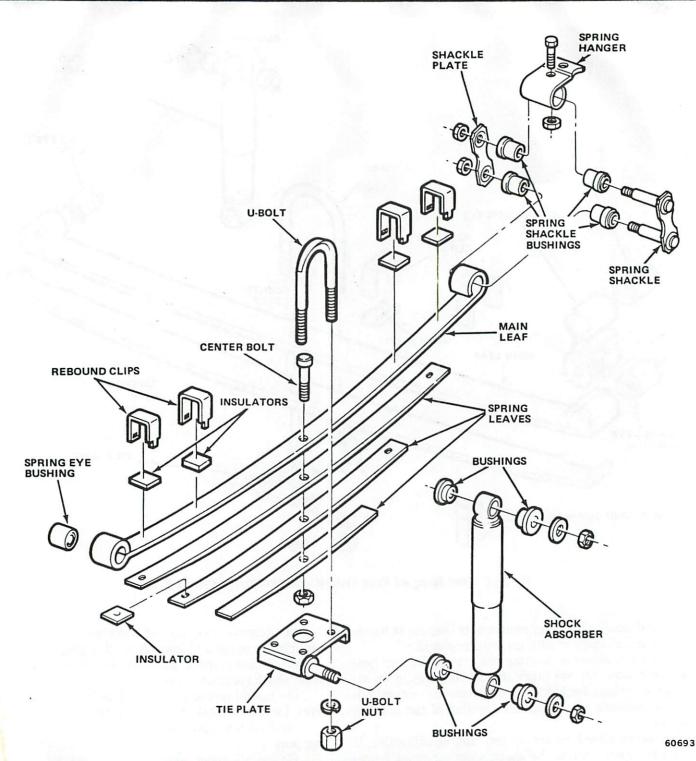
N-3 Rear Spring and Shock Absorber—CJ and Scrambler Models
